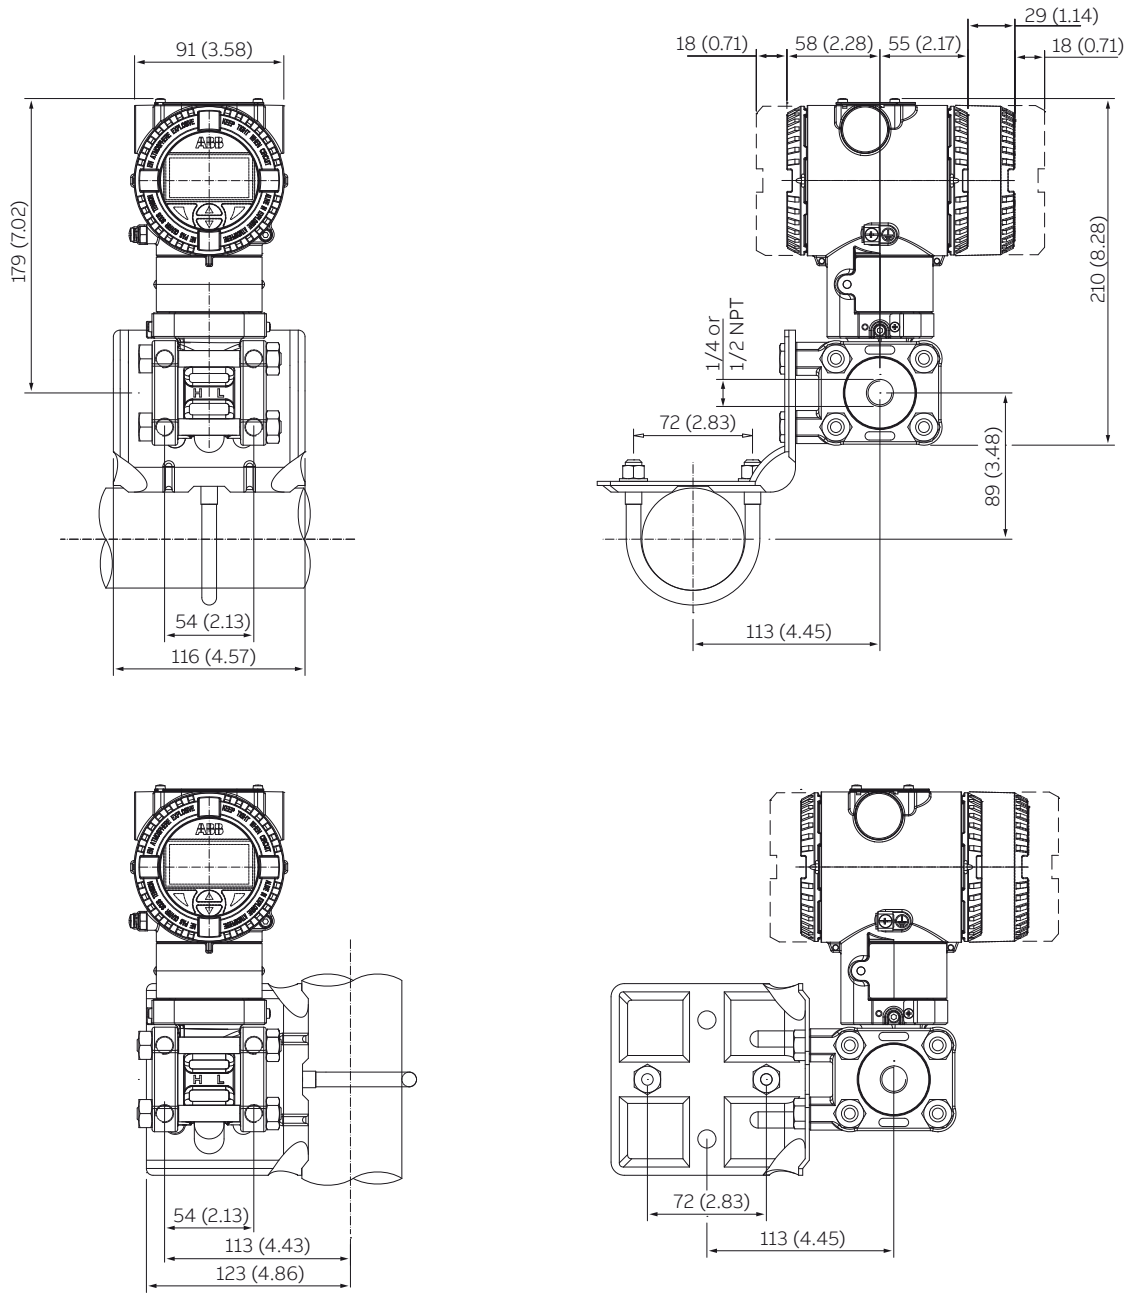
Transmitter with Kynar flanges on bracket for vertical or horizontal 60 mm. (2 in.) pipe mounting
